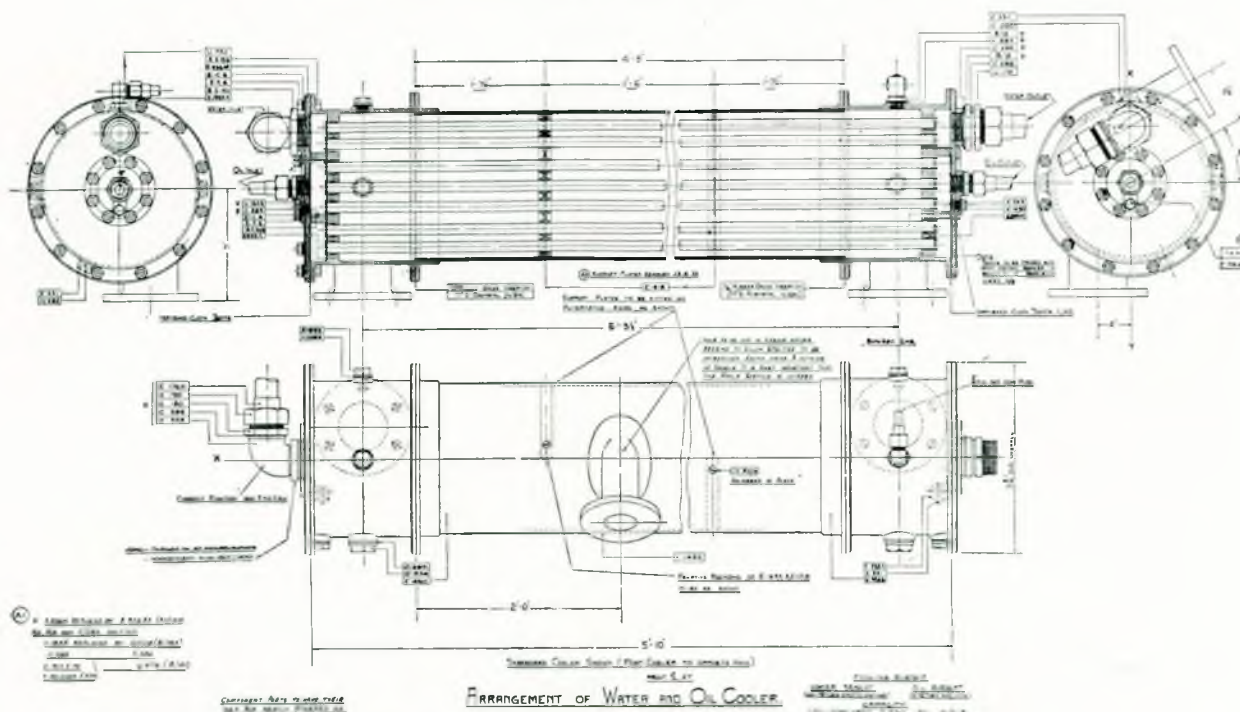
Combined water and oil cooler (C.E.4 type).
